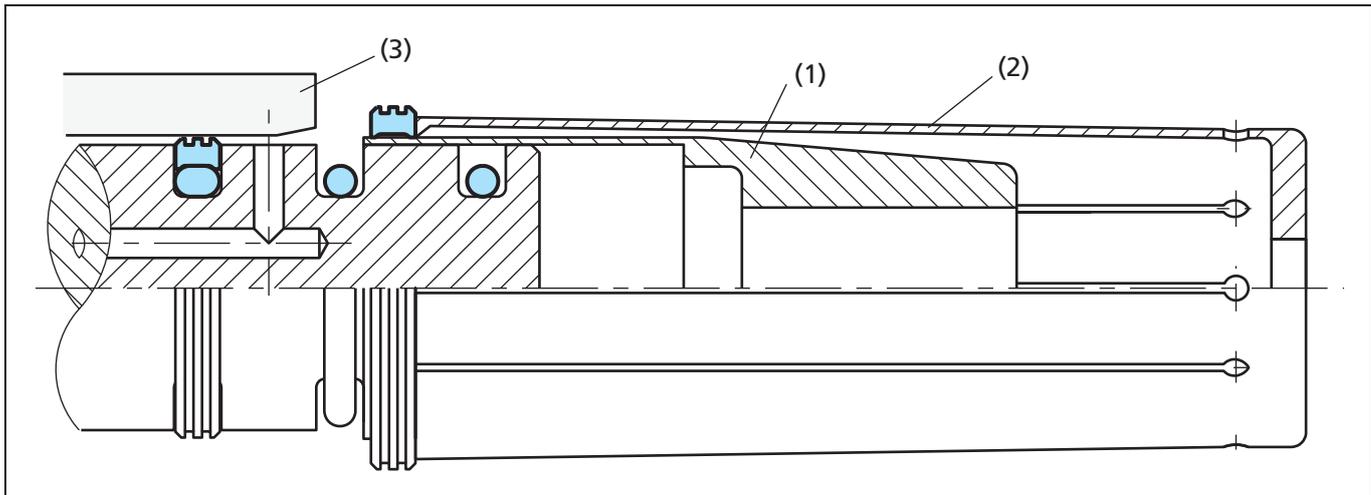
Expanding the Turcon[®] Roto Glyd Ring[®] over the installation sleeve using an expanding sleeve
